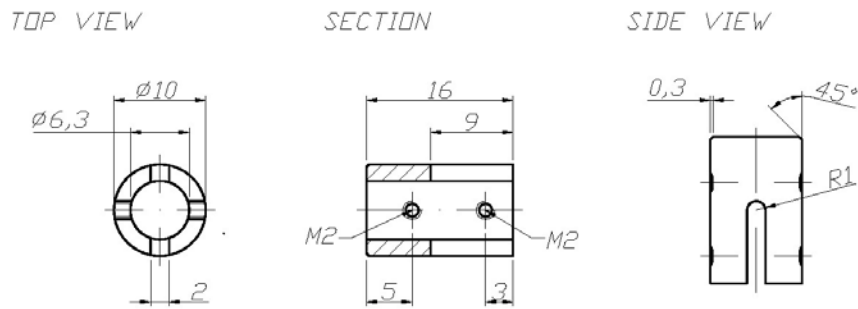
A detail drawing of the probe holder design (not to scale).
